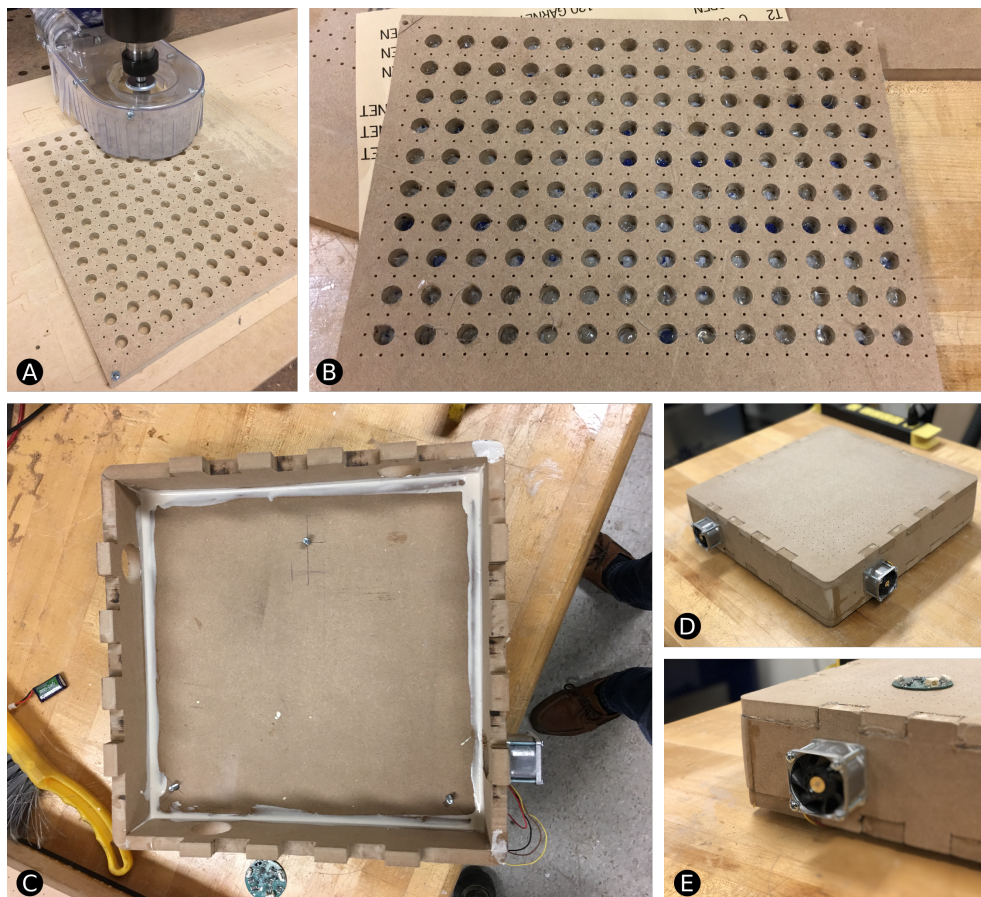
Manufacturing collage of the magnet-levitation table. A) A CNC-machine processes a sheet of MDF. It drills air holes, mills magnet pockets, and contours all six table parts. B) Magnets are inserted into pockets and glued into place. C) The four side-walls and the bottom layer are glued first. D) The top surface follows. E) Four fans are attached; one fan per side-wall.
